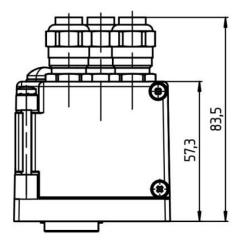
Dimension drawing BE 901 MS SSI connection hood (all dimensions in mm)
